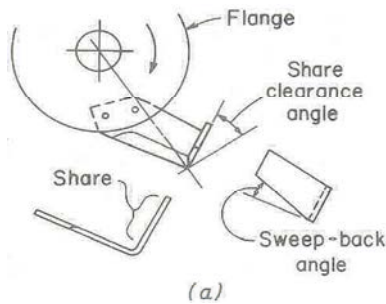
Three views of an L-shaped blade for rotary tiller [20]
